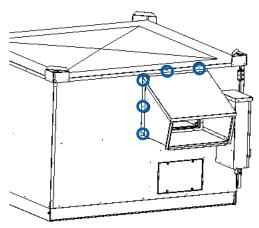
EXHAUST AIR HOOD (TYPICAL)
